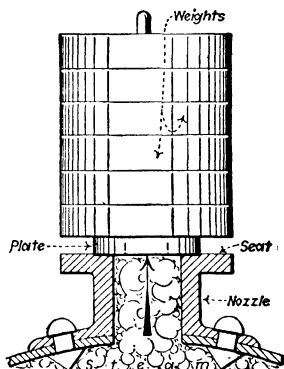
Elementary form of safety valve with flat-seated valve.
